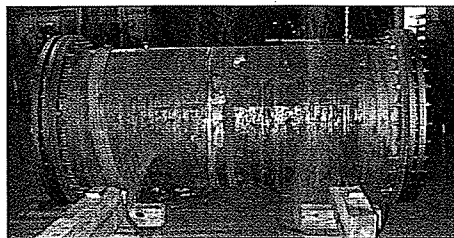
Example of a shell side test fixture for lube oil cooler bundles
